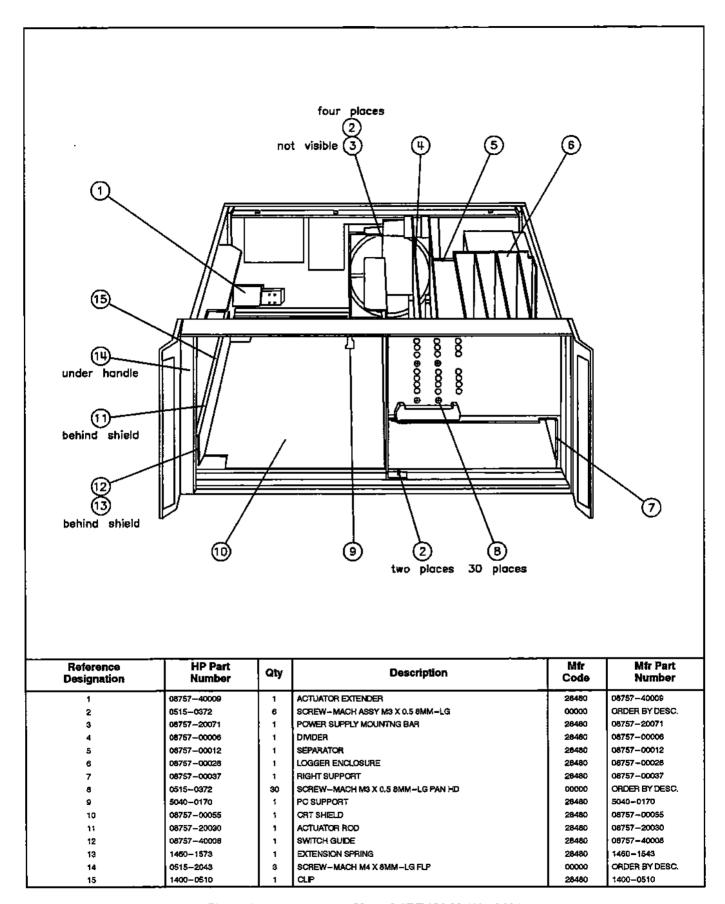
Cage Assembly and CRT Shield (12 of 13)
